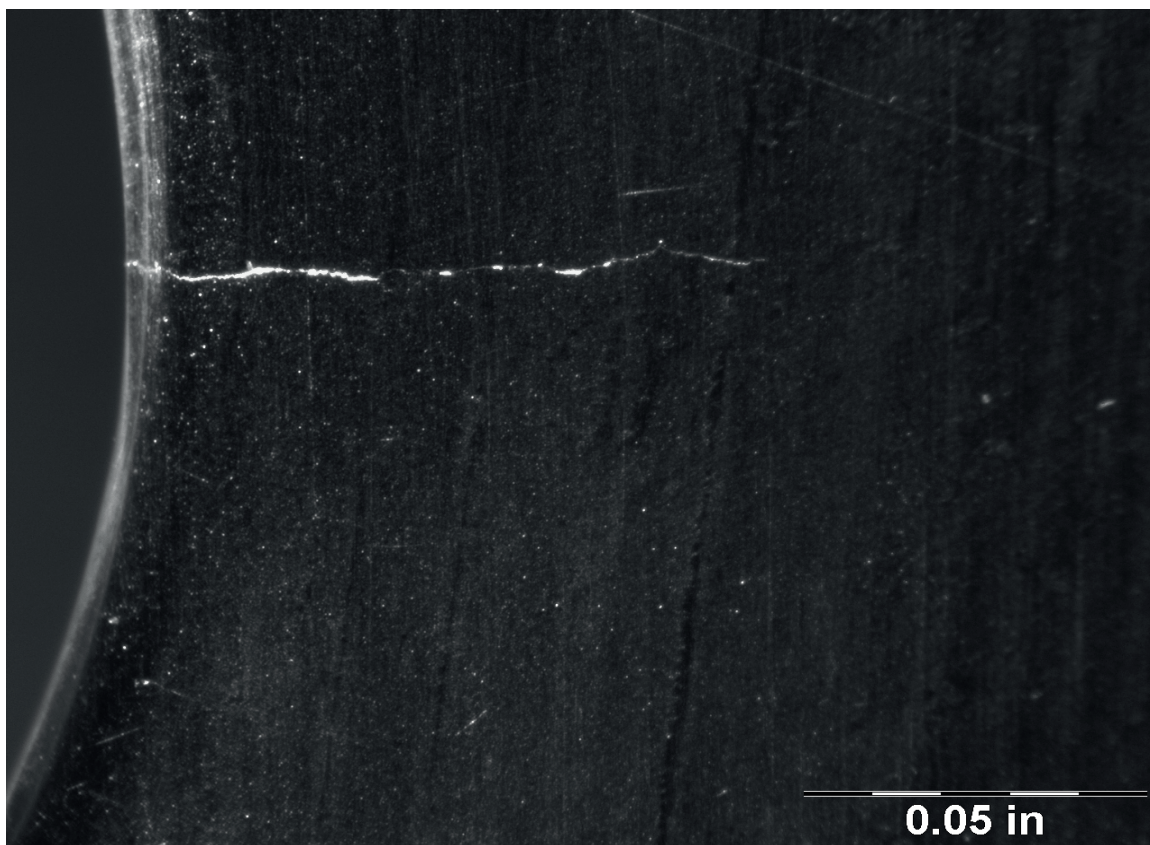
Image of Surface Crack in Coupon Cx4N1-03-B, Surface Crack Length is 0.0974 inch.
